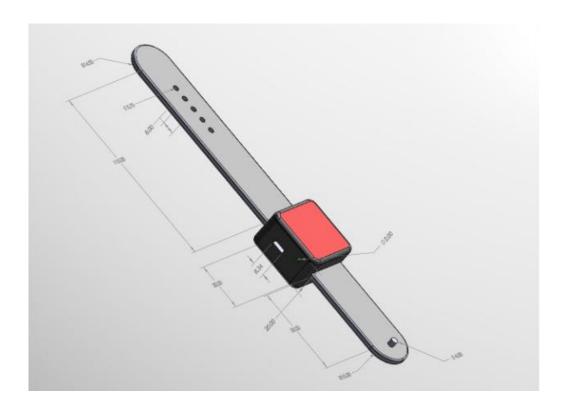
Isometric View of Proposed Final Design Drawing (all measurements in mm)
